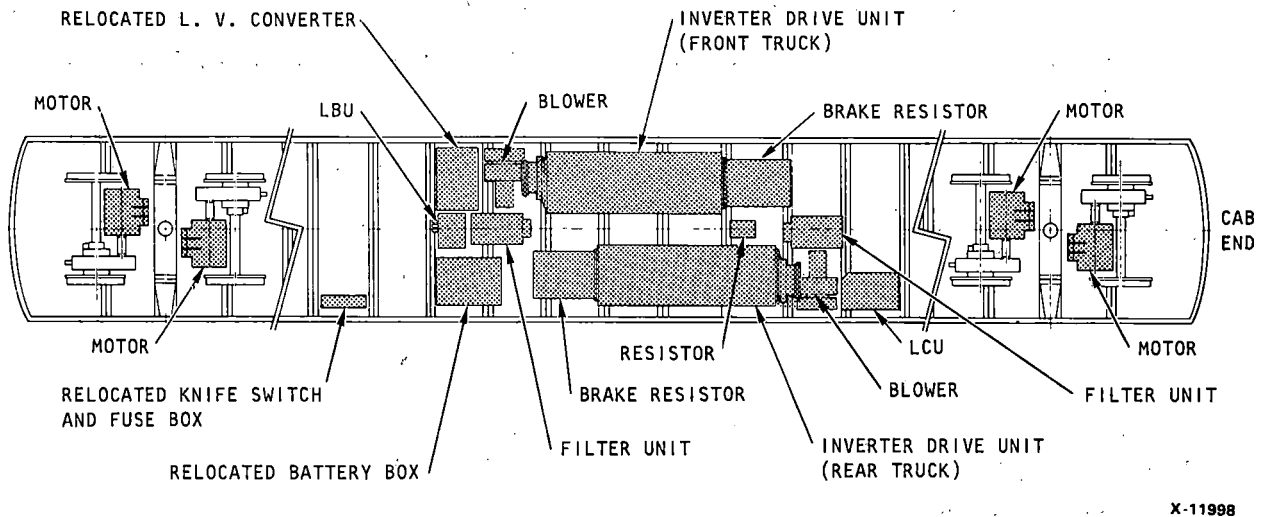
UNDERCAR EQUIPMENT ARRANGEMENT
